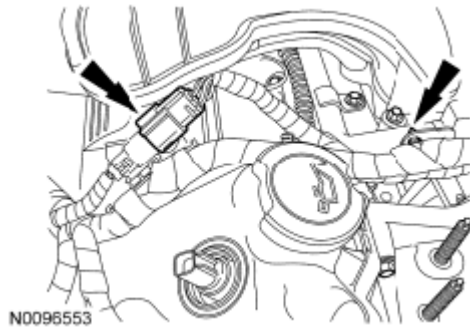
Locating Fuel Injector Wiring Harness Electrical Connector & Wiring Harness Retainer
